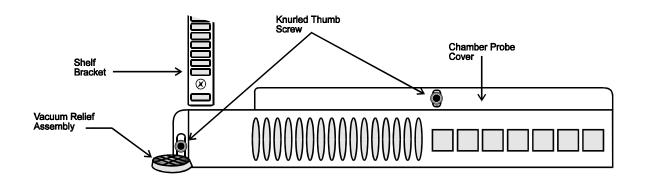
Vacuum Relief and Probe Cover Assemblies
